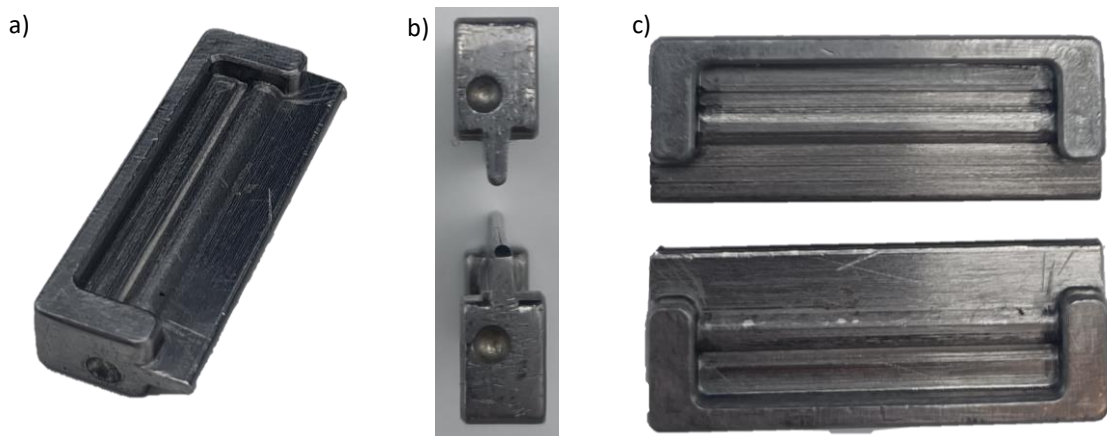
a) Demoulding insert perspective view, b) demoulding insert side view, c) demoulding insert top view
